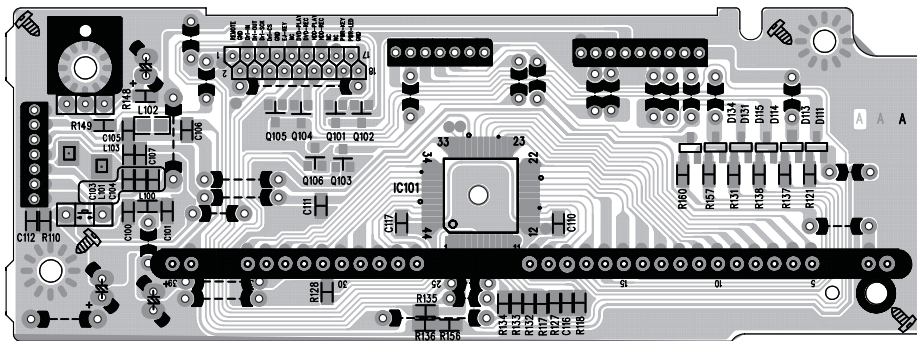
EU03A Front (R) PC Board (Bottom side)
